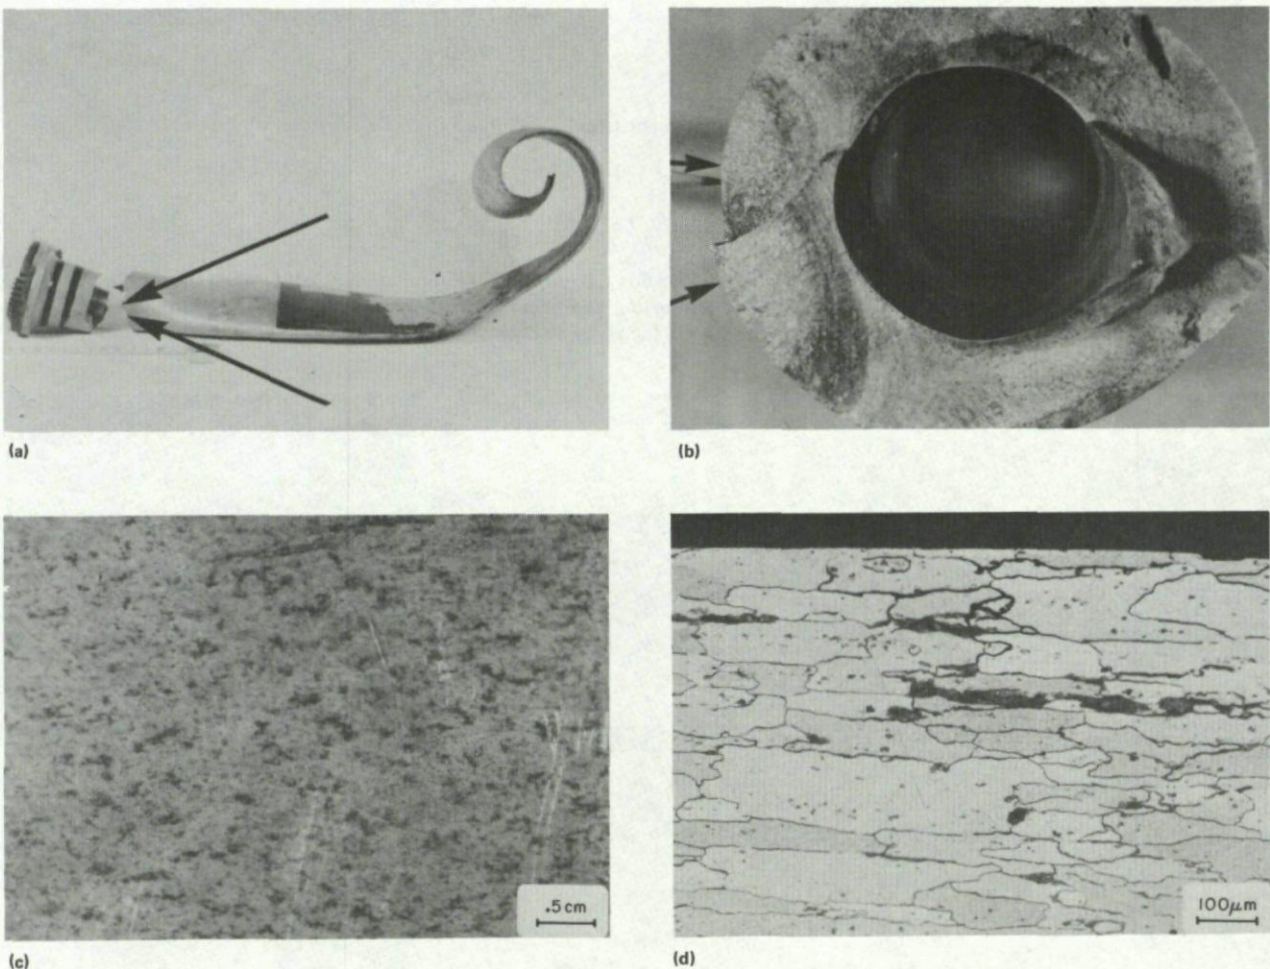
Intergranular corrosion and fatigue of an aluminium alloy propeller
